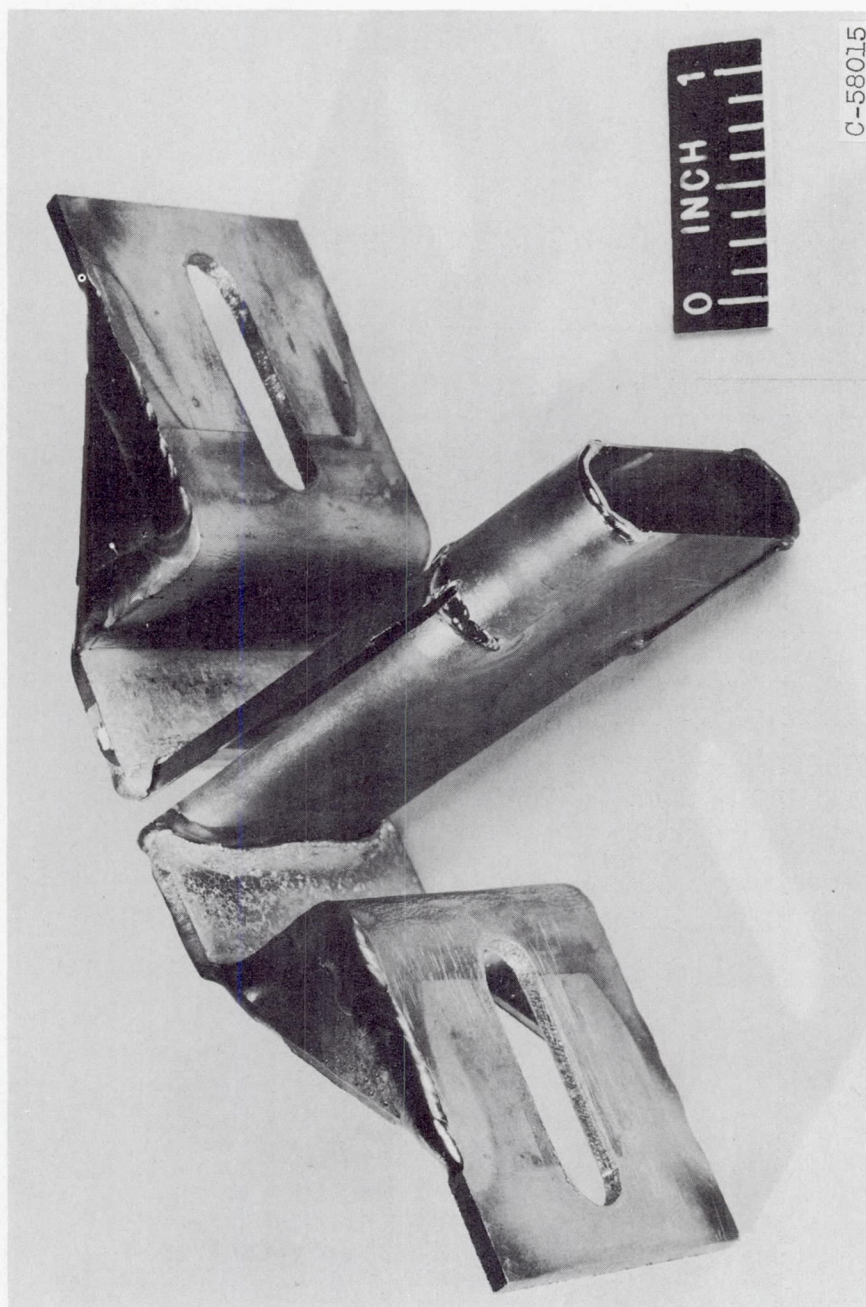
Tungsten heater used on tensile-testing and stress-rupture machines.
